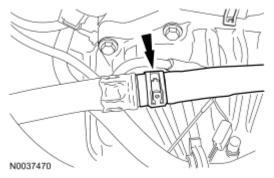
Locating Heater Hose Inline Connector Courtesy of FORD MOTOR CO.
